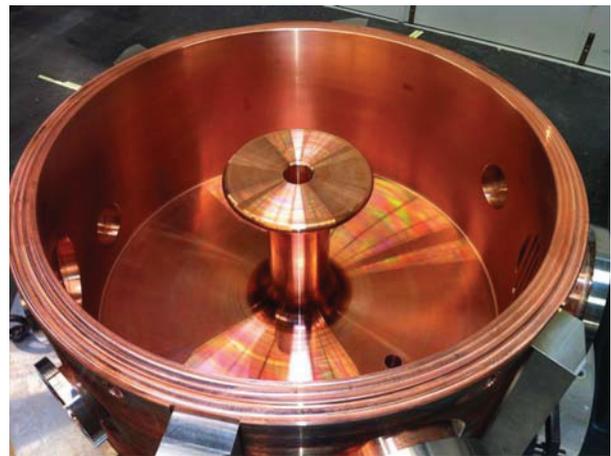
Inside of the 105 MHz ASTRID2 cavity before final weld of the endplate.
